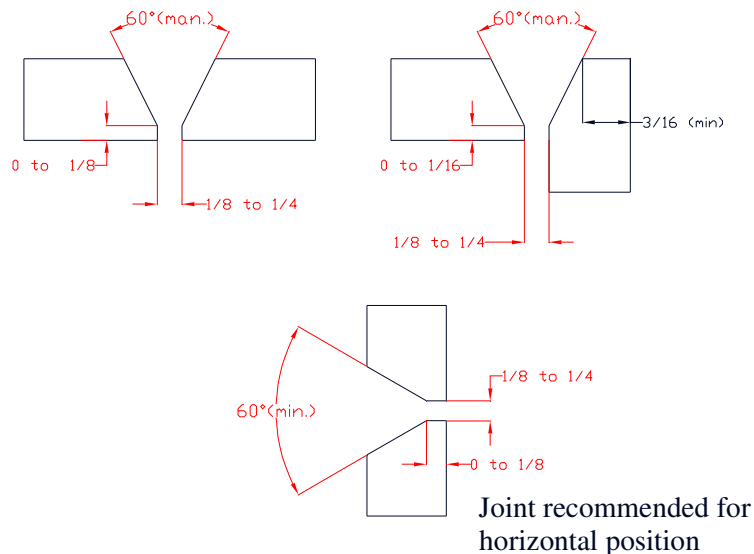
a. Square-V groove joints for welding one or both sides.
